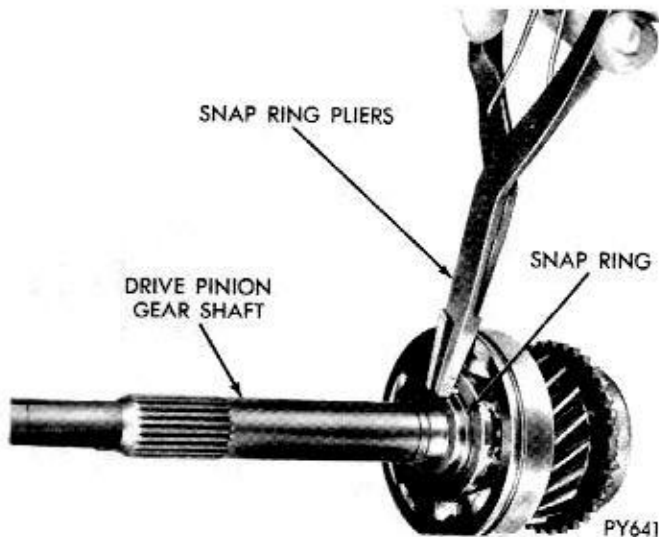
Snap Ring, Pinion Shaft to Bearing—Removal or Installation
